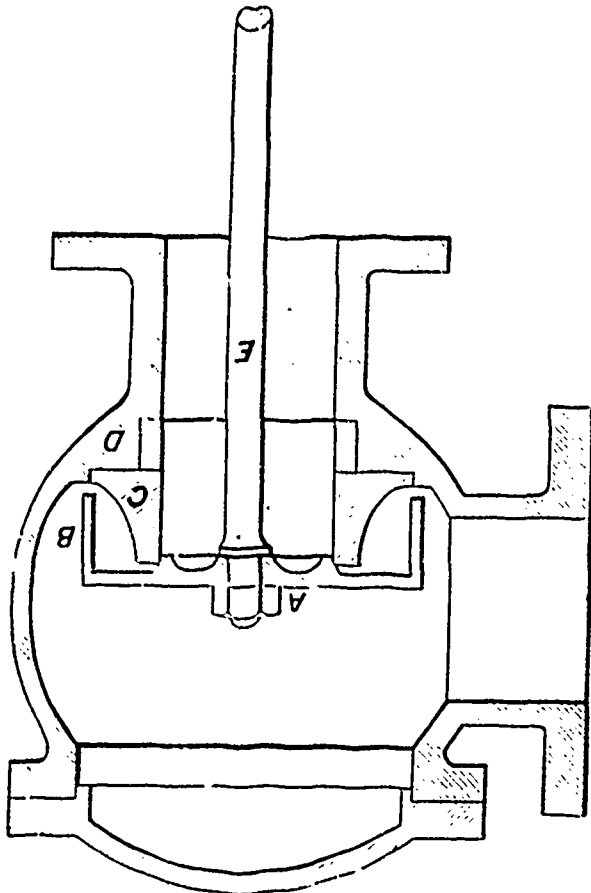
THE HARTLEY VALVE, AUGUST 19, 1857.
